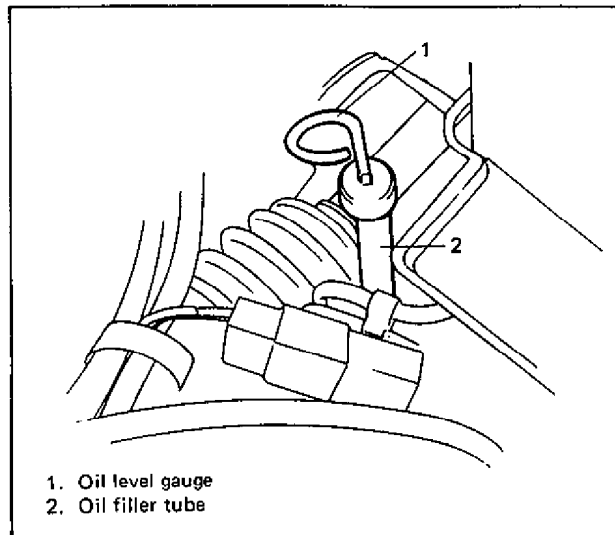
B-9-1 Oil Level Gauge and Oil Filler Tube
